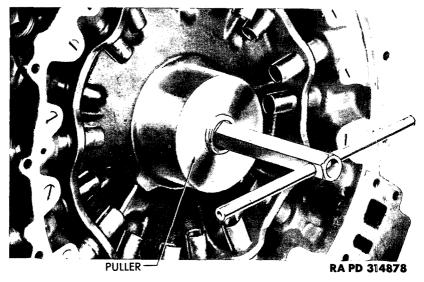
Seating Rear Main Bearing with Puller (Replacer) 41-R-2373-675
